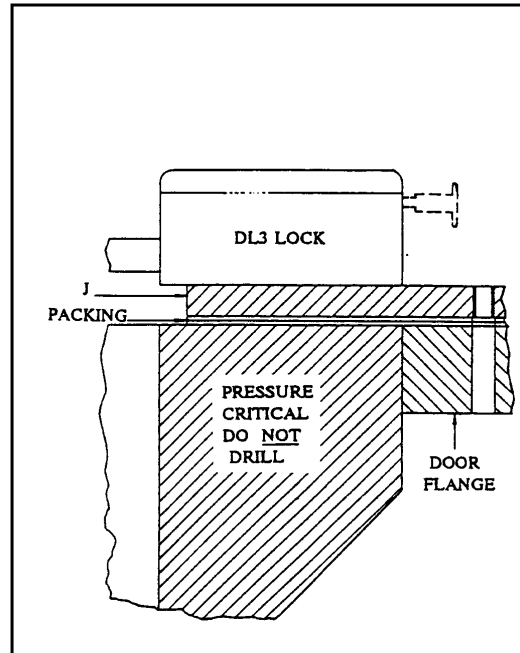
Insert bar key into lock ass'y & remove SFC key. Place lock ass'y in desired position on door flange, then drill through door flange (9mm dia.) to suit SFC [slide] bracket (J) & M6 x 10 deep to suit fixings security cover. (See Fig 6).
